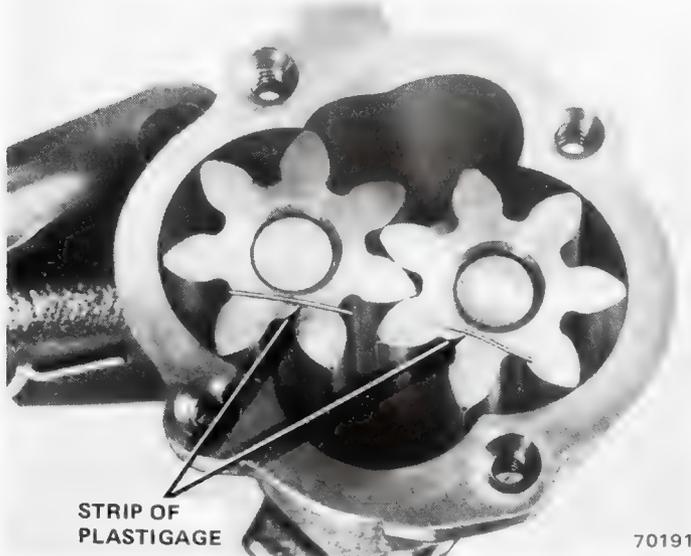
B-95 Oil Pump Gear End Clearance—Plastigage Method
